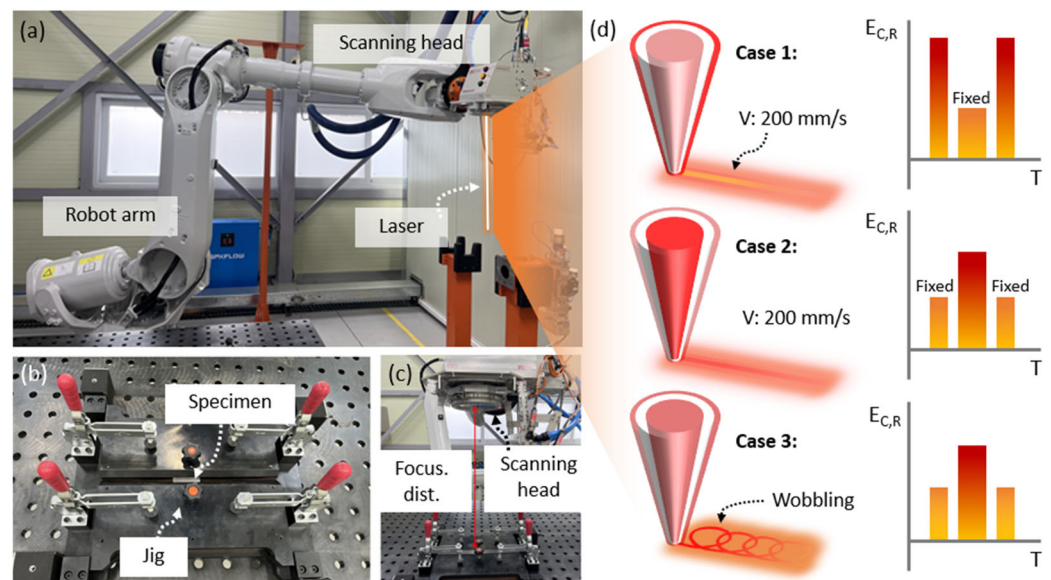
Experimental setup (a) Robot arm-based laser welding (b) Jig for placing target specimen (c) Scanning head aligned to the target (d) Laser variation.
